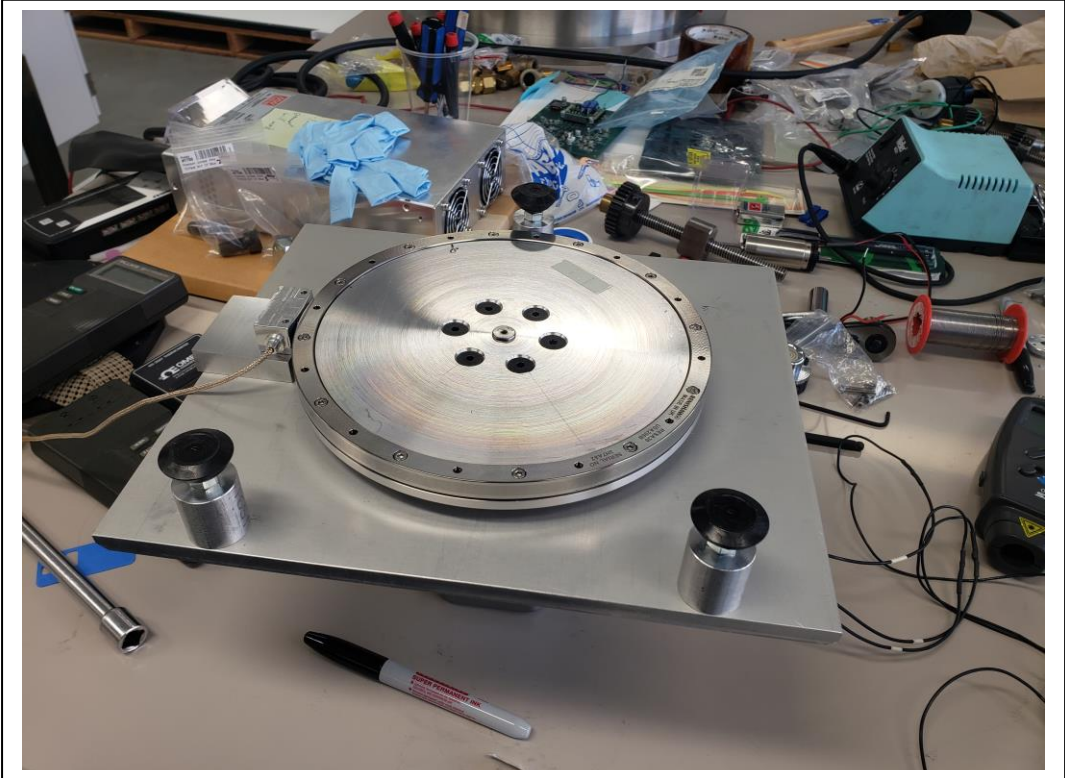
Final Assembly of Rotary Encoder Test Fixture
